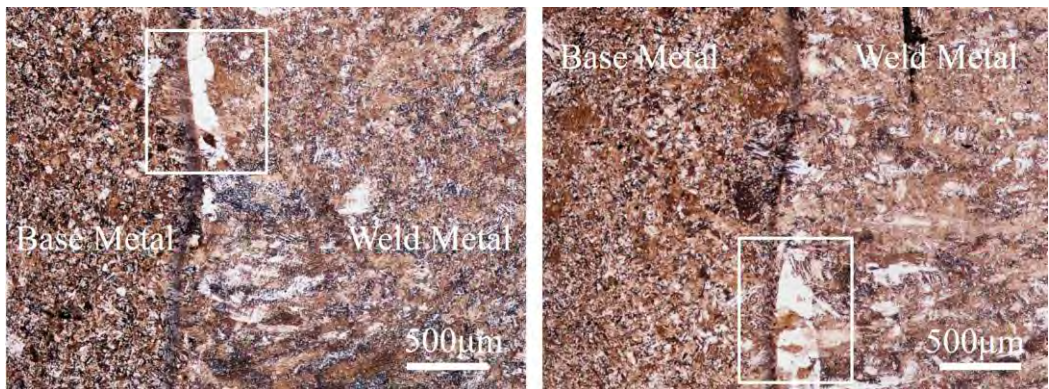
Ferrite structure in carbon-depleted zone in weld joint
